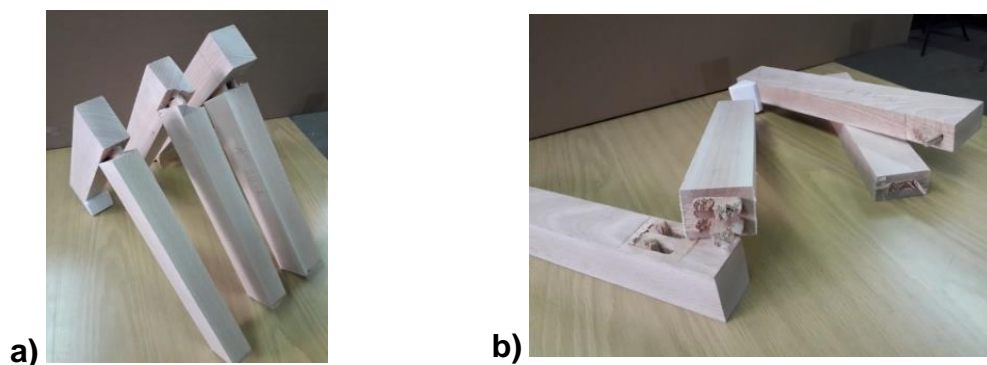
Type of standard and double joints failures: a) tenons pull out from the members after the glue line fractured and the fracture of wood of a joint member, b) the fracture of joints tenons
